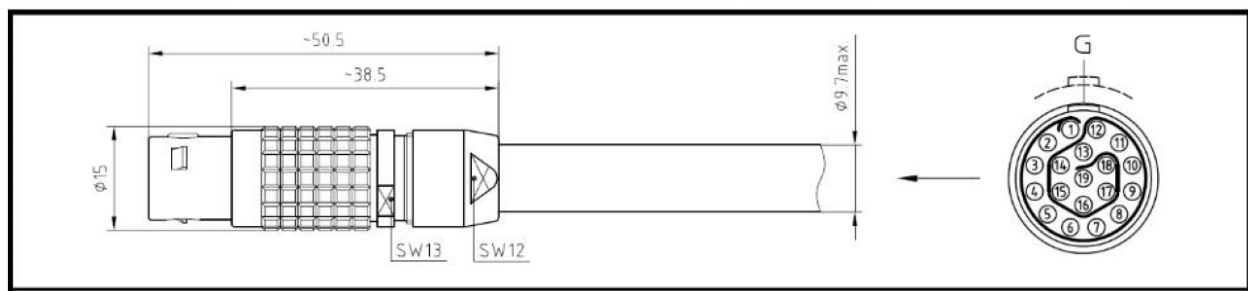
Figure 12 Sectional View of 19 Position Wiring Cable
